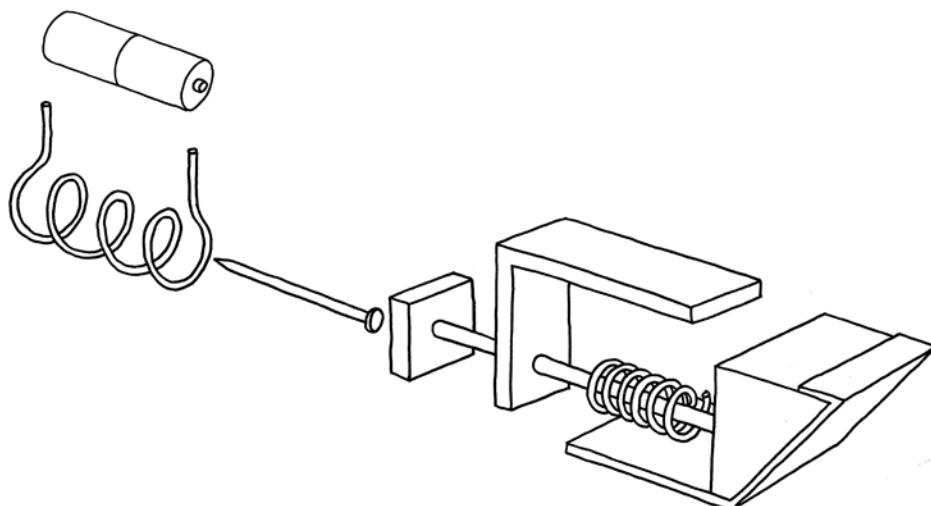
A 3D assembly drawing of the parts inside an electric door lock
